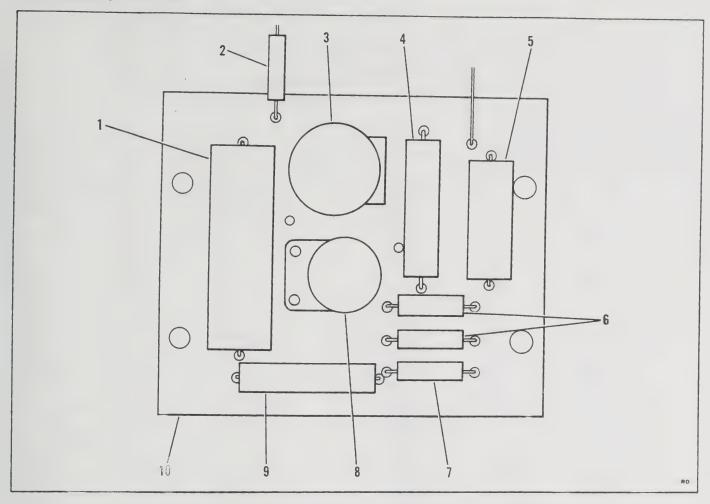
Printed Circuit Board Assembly, Part No. 400D-65C
